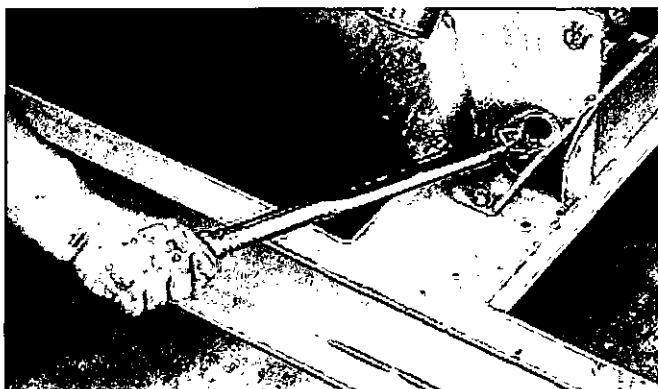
Engine Mounting Bolts - Checking Torque
